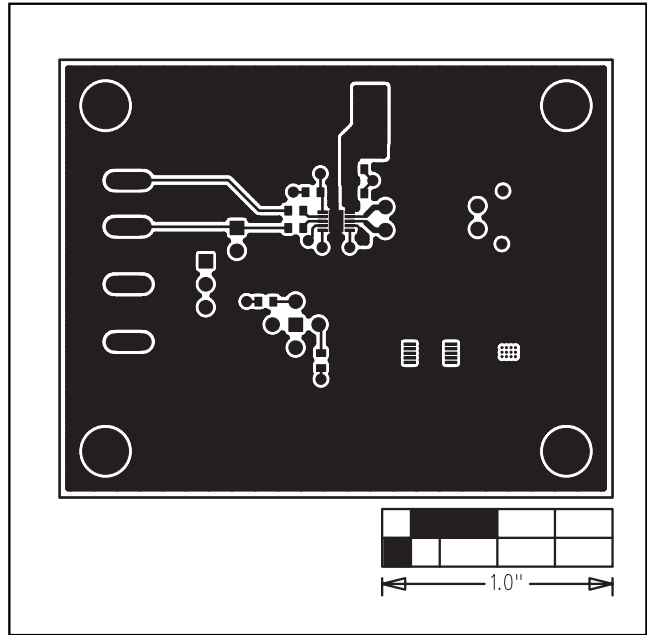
MAX9705B EV Kit PC Board Layout—Component Side
